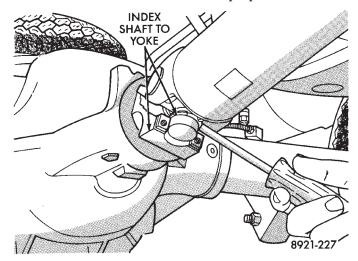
Marking Propeller Shaft And Yoke For Alignment Reference
